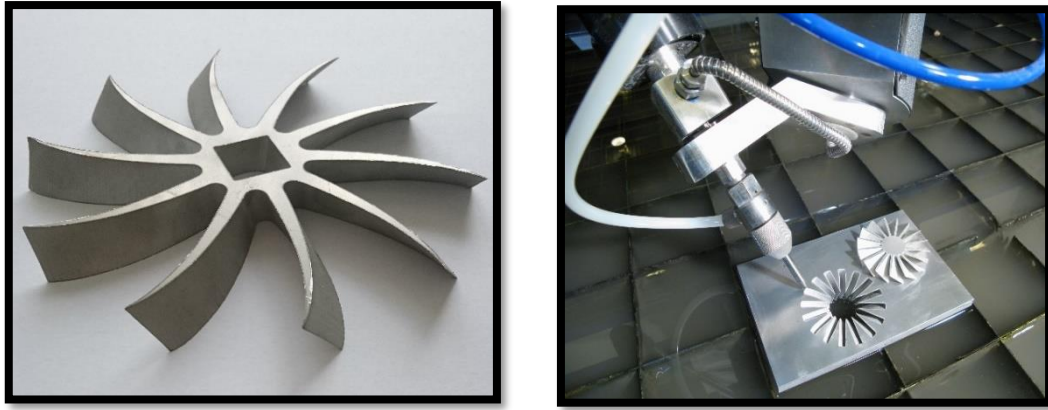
Finished parts with Waterjet Machining 5 axis
